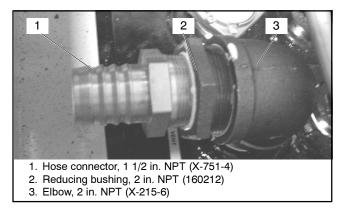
Secure Subassembly to 2 in. NPT Elbow
